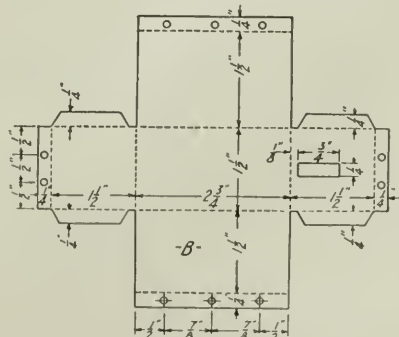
Dimensions for cover to fit magnet taken from bell or buzzer
